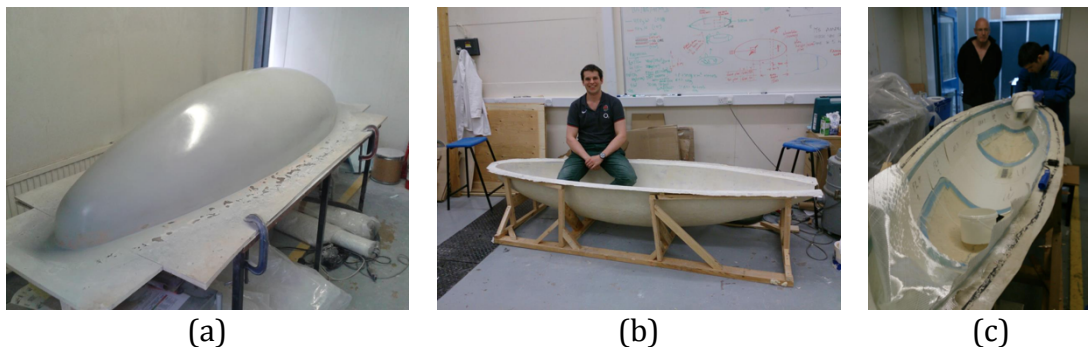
The manufacturing process for the hull showing the (a) finished plug, (b) female mould and (c) manufacturing a half-hull.
